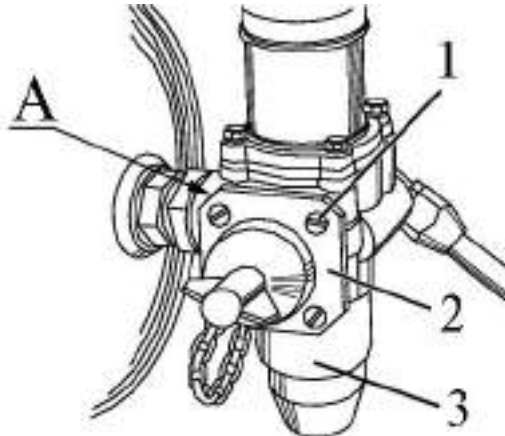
Adjust parking-reserve brake control (with rod)
